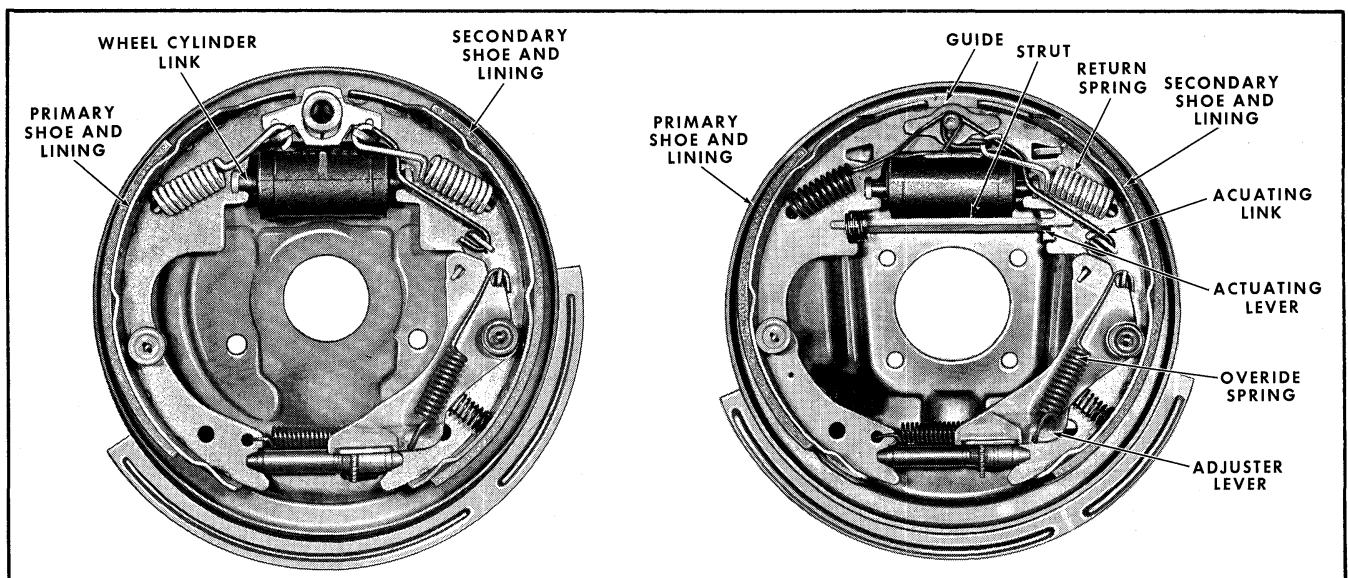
Front and Rear Self-Adjusting Brake Assemblies
